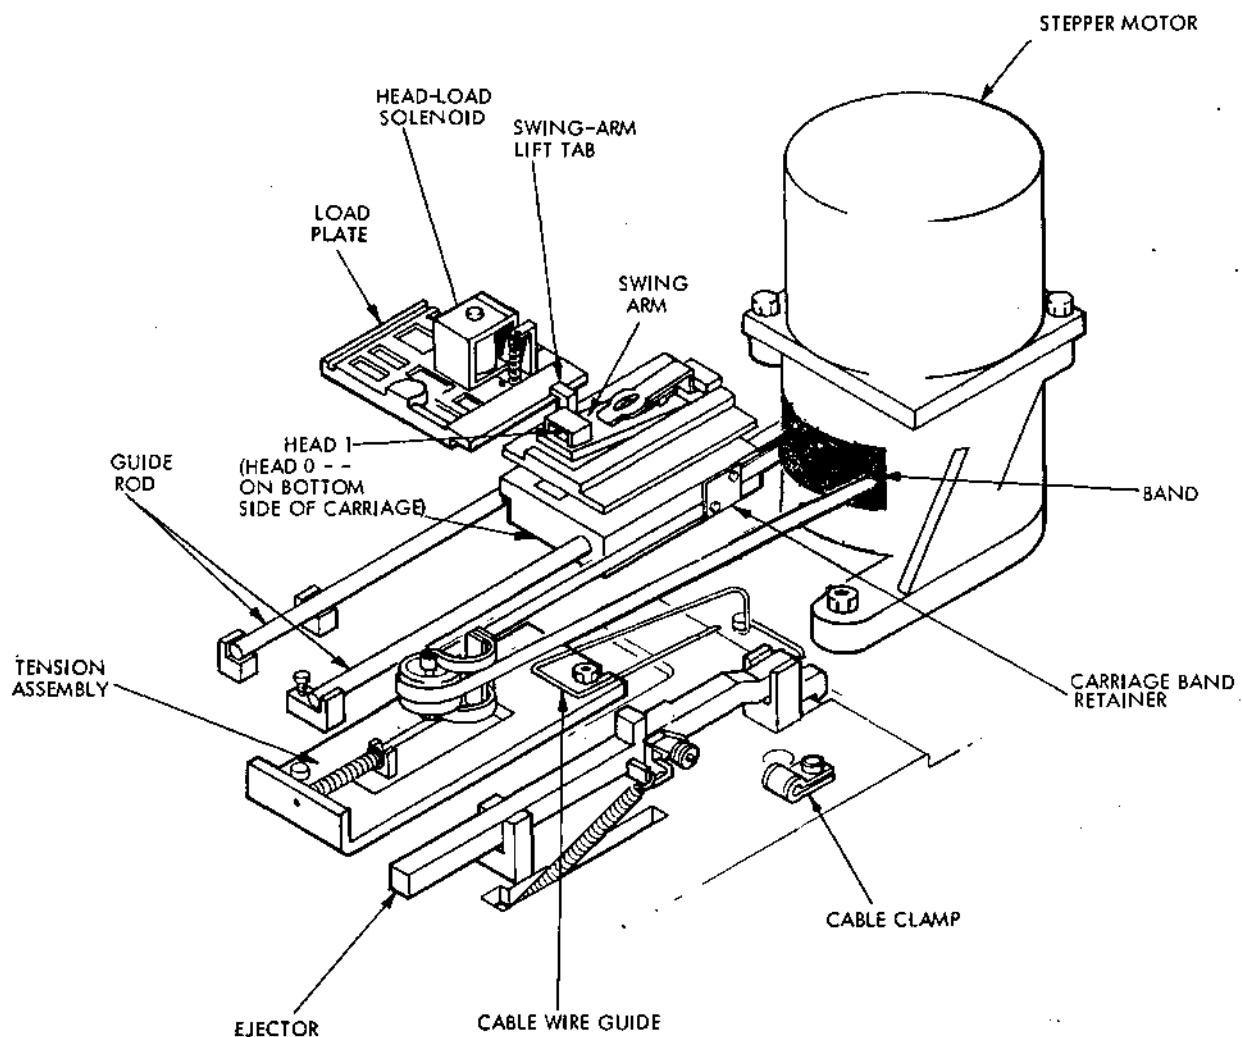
Head-Load Carriage and Stepper Motor Details.
